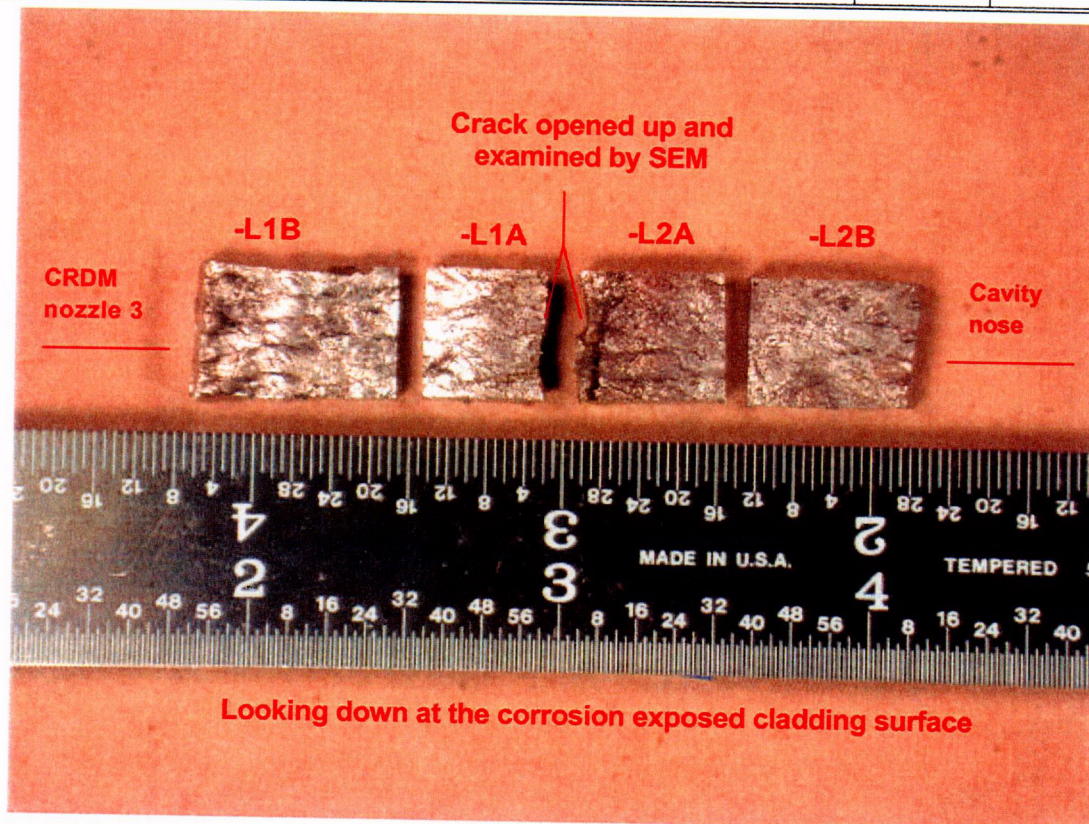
Section photo for Piece A2A7L. The main crack located near the center of A2A7L was opened in the laboratory, resulting in Pieces A2A7L1 and A2A7L2. Additional sections, which created the -A and -B pieces, were made to facilitate the SEM examinations. The surfaces examined by SEM are indicated.
